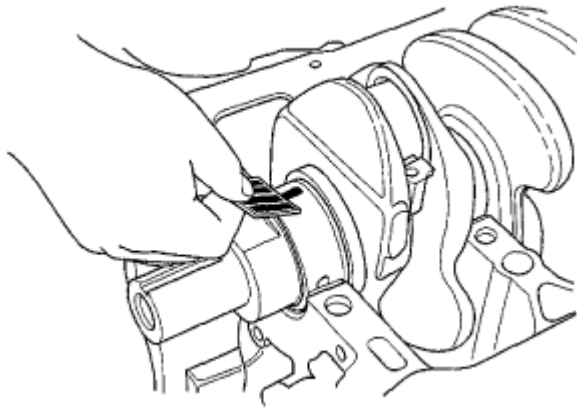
Measuring Main Bearing To Journal Oil Clearance
